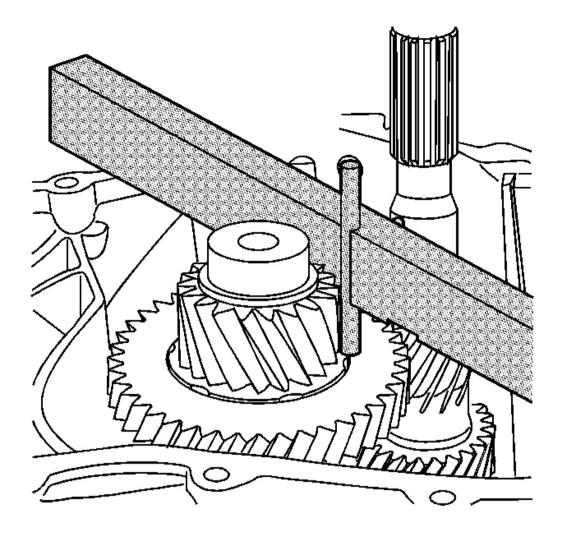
Case Parting Surface & J 44388-1 Courtesy of GENERAL MOTORS CORP.
